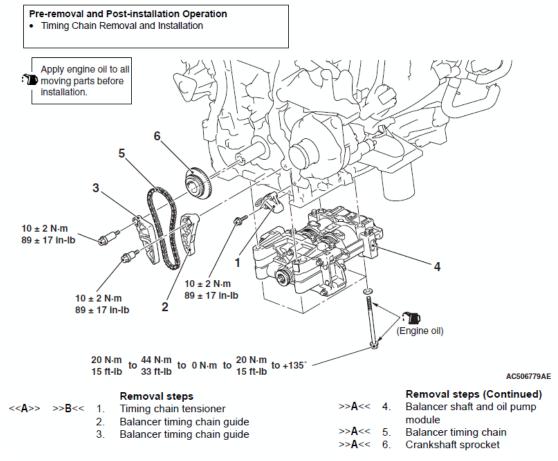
Identifying Balancer Timing Chain, Balancer Shaft And Oil Pump Module Components With Torque Specifications
